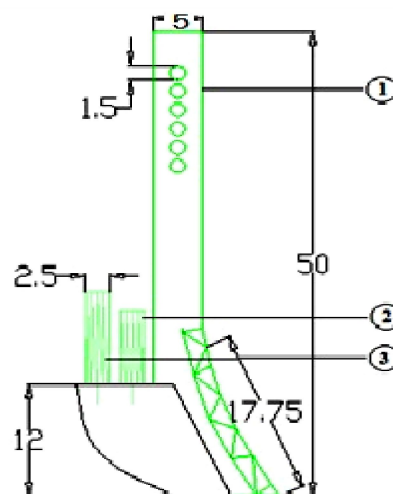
Hoe-type furrow opener. (1. standard, 2. fertilizer tube (2.5 cm dia) 3. seed tube (2.5 cm dia), [All the dimensions are in cm]
